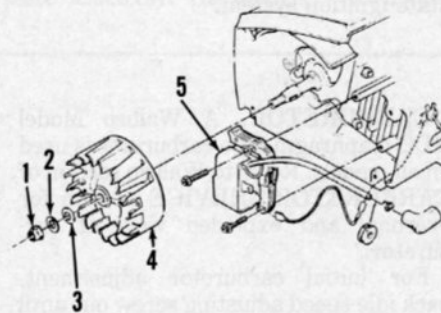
A—Exploded view of solid-state ignition used on later Super EZ Automatic models.
